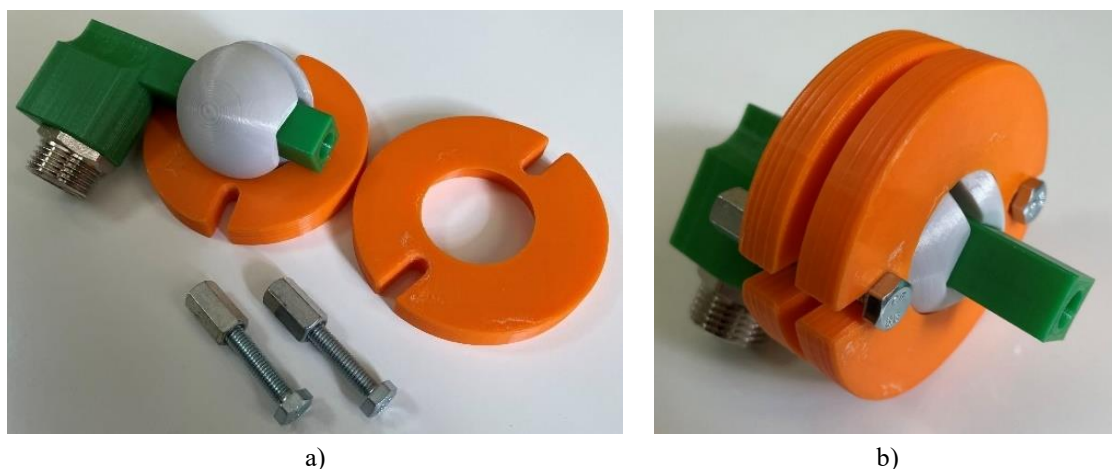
Controlled nozzle apparatus (variant): (a) parts of the nozzle apparatus equipped with a primary ejector and spherical joint; (b) assembled physical micromodel
